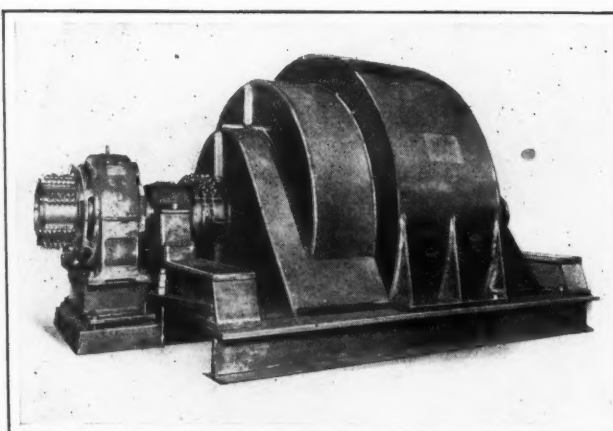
Large Condenser which Has an All-steel Welded Housing, Base, and Bearing Pedestal
